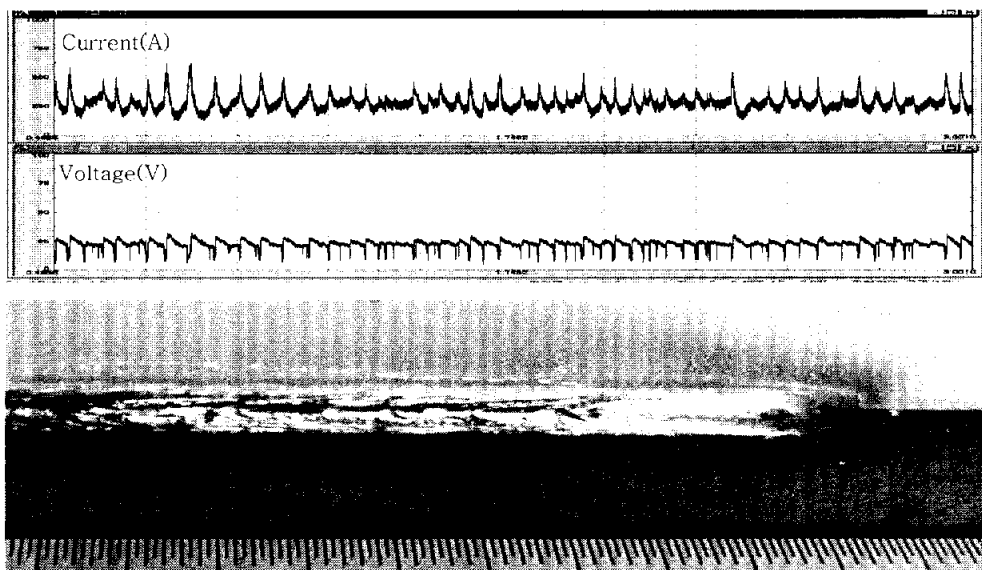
Waveforms and bead shape at welding current 283A
